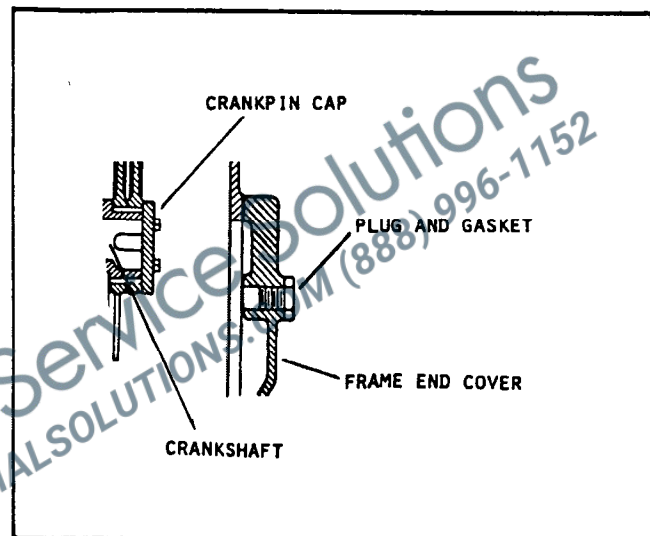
Showing arrangement of crankshaft and frame end cover on unit without centrifugal unloader and pilot valve assemblies.
